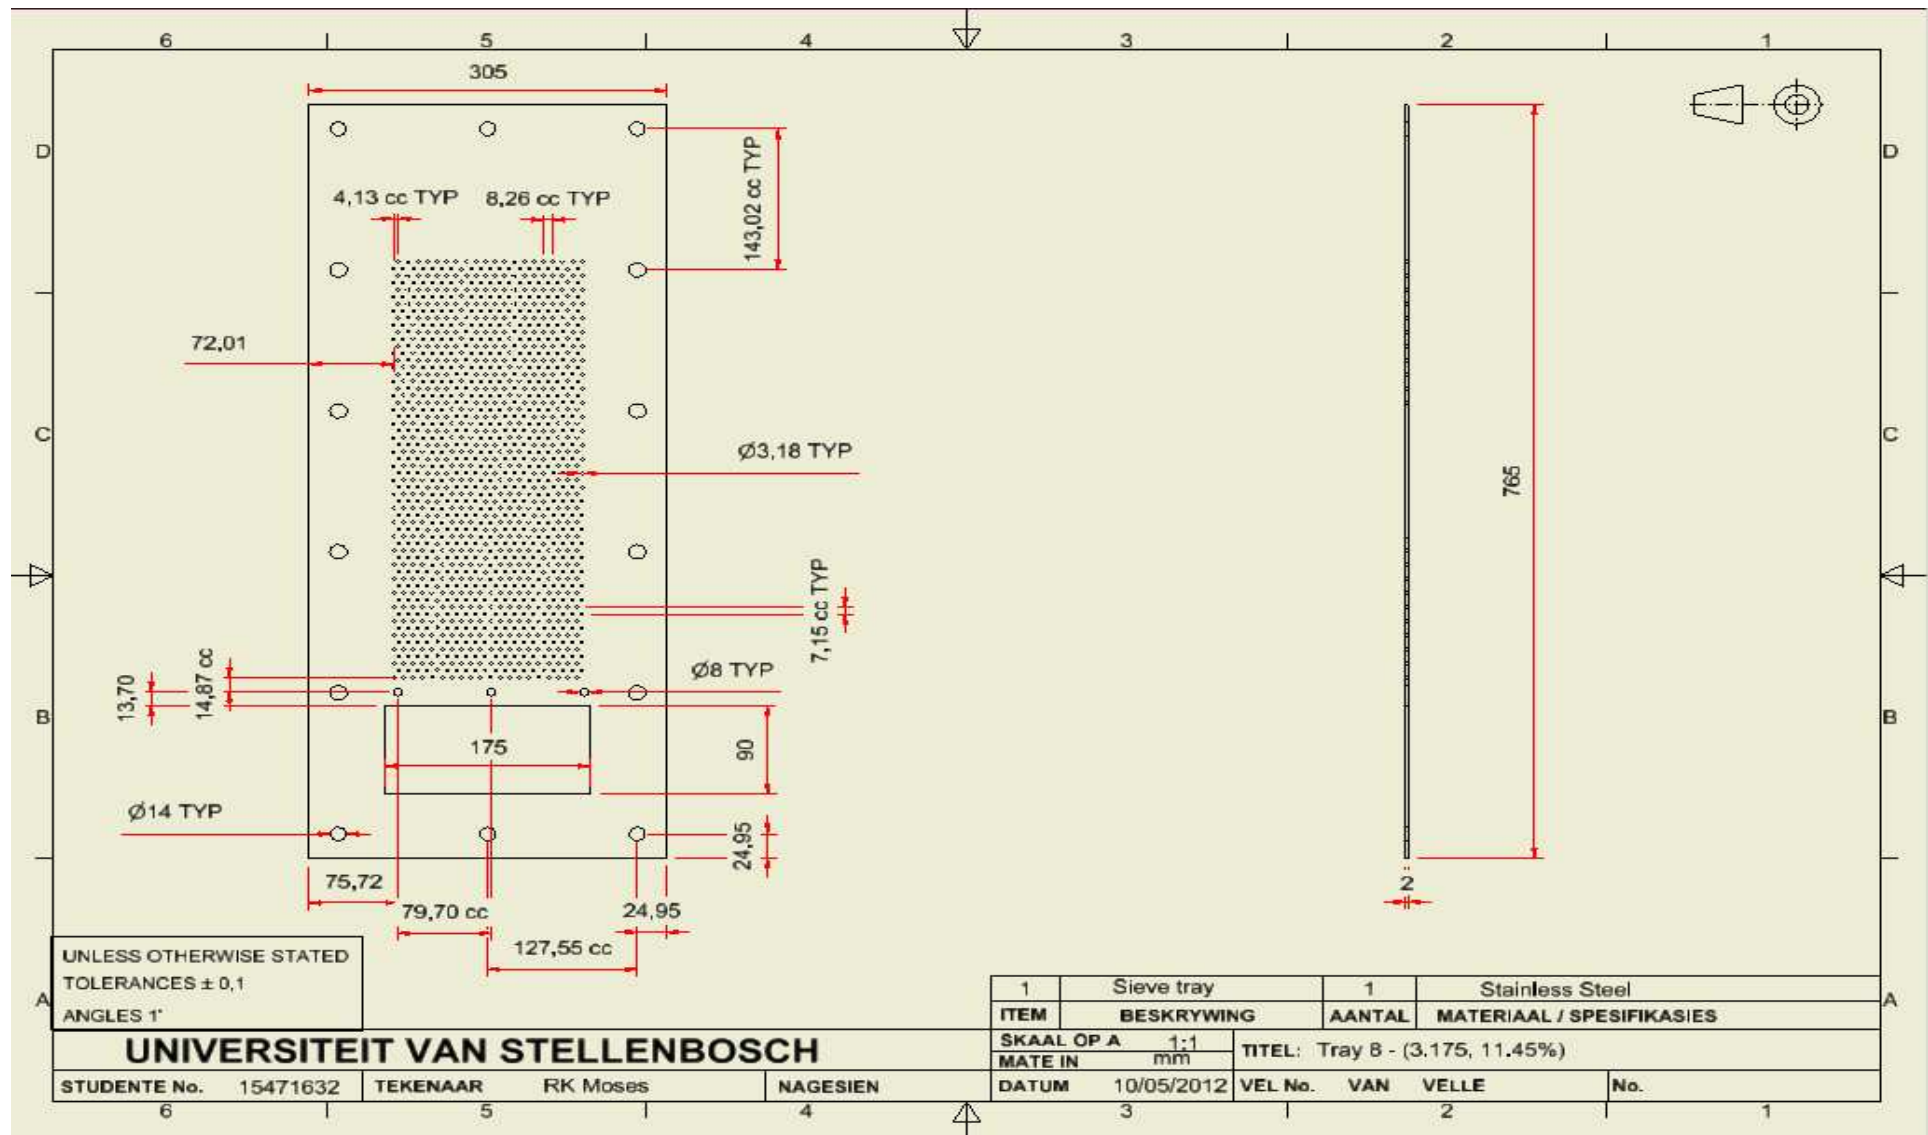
Tray 8 with 1/8 in. (3.2 mm) hole diameter and a fractional hole area of 11.5%
